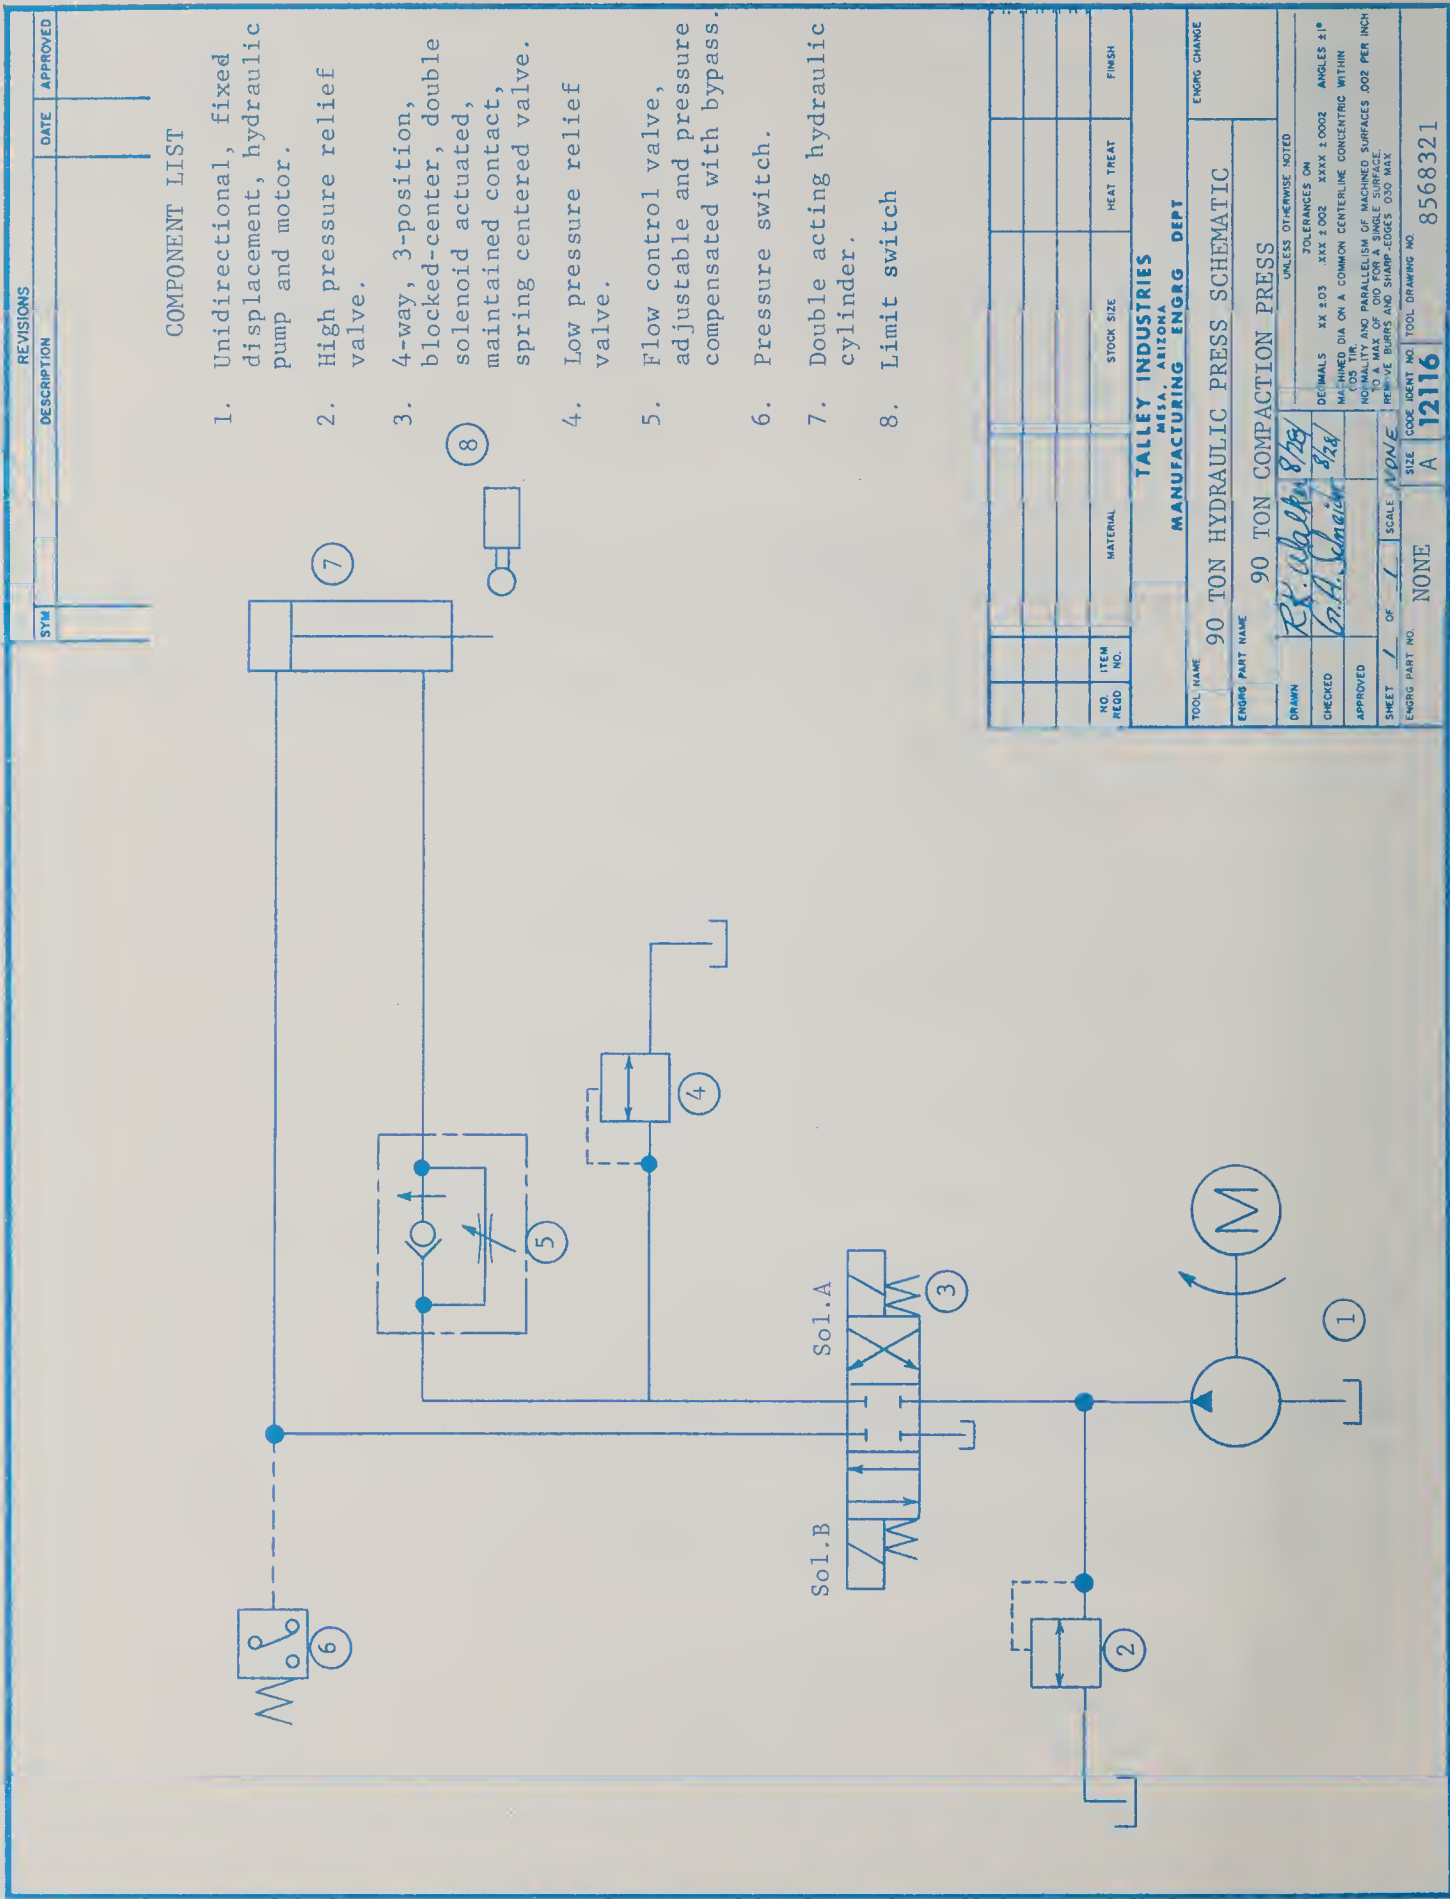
BPR-2. Industry blueprint. (Talley Industries)
